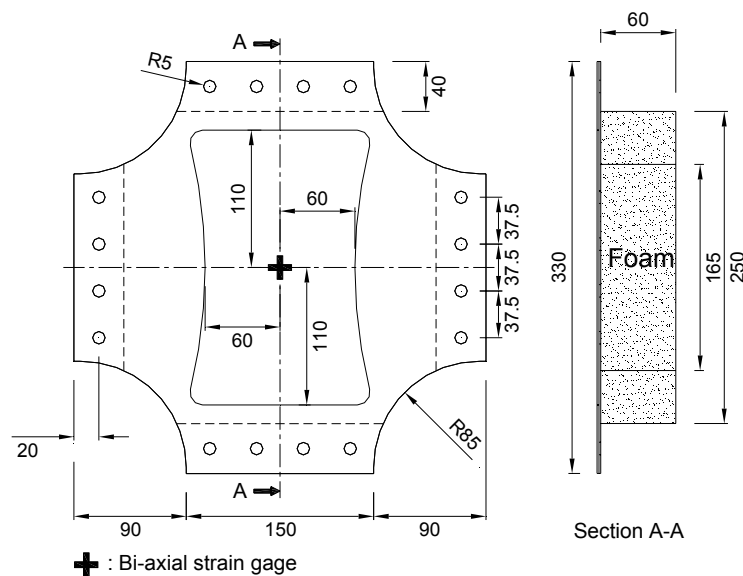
Specimen geometry in [mm] and instrumentation.
